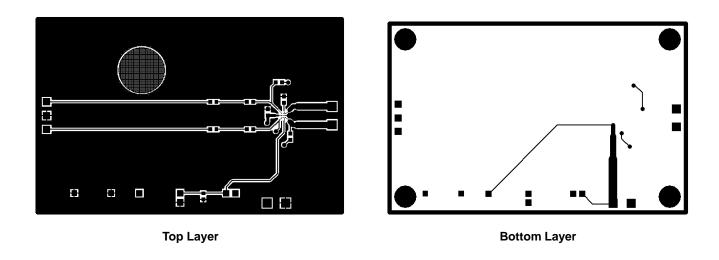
Demonstration Board for 9-Pin Flip-Chip CSP Device - PCB Layers
